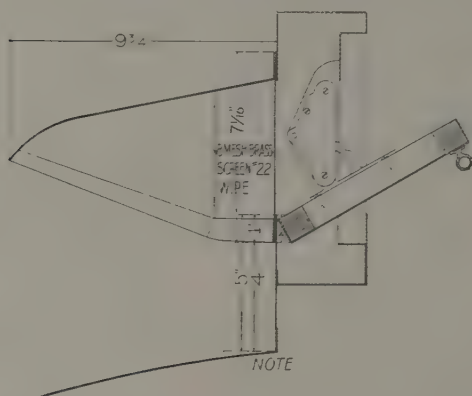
Ventilating Hood, Cross Section of Steel Car. Vapor Car Heating Company.
